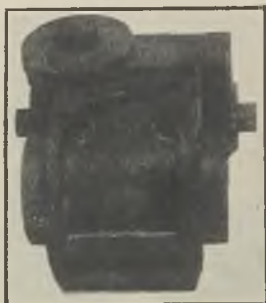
SMALL STEAM CYLINDER PATTERN.
